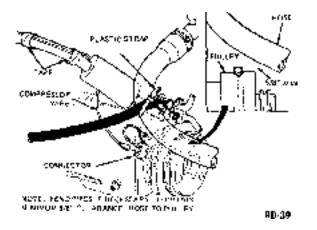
B-56 Pipes, Hoses and Compressor Wire Location • Opel 1900 Manta
